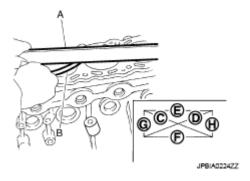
Measuring Distortion On Cylinder Block Upper Face Courtesy of NISSAN MOTOR CO., U.S.A.
